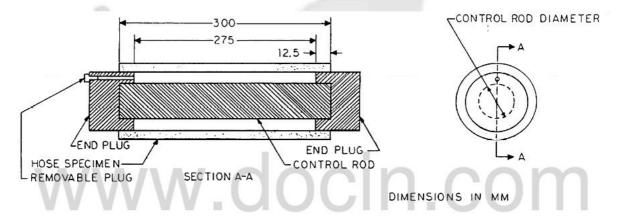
TEST FIXTURE FOR EXTRACTABLES
